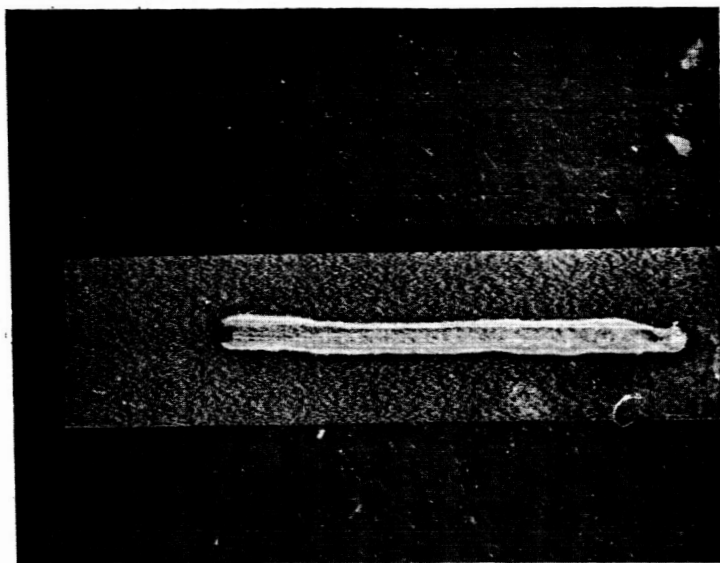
Photomacrograph of 6Al-4V Titanium seam weld. Weld schedule: 1.99 volts, 20 lbs. pressure, 30 inches/minute speed.
